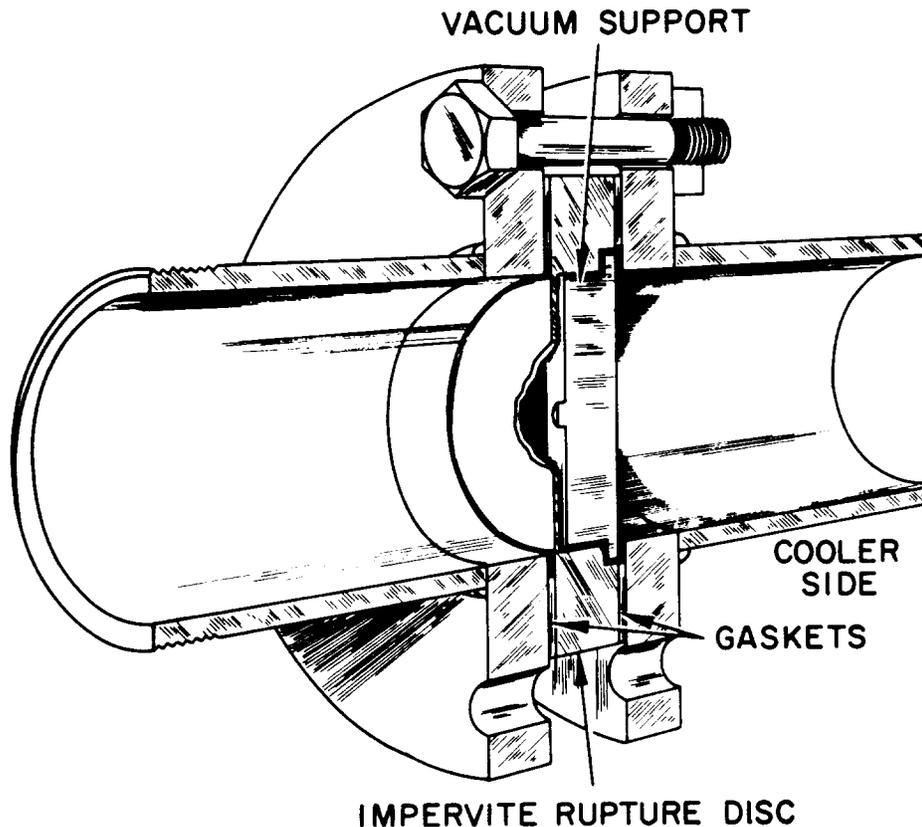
Rupture Valve Assembly (Carrier Corp.)
